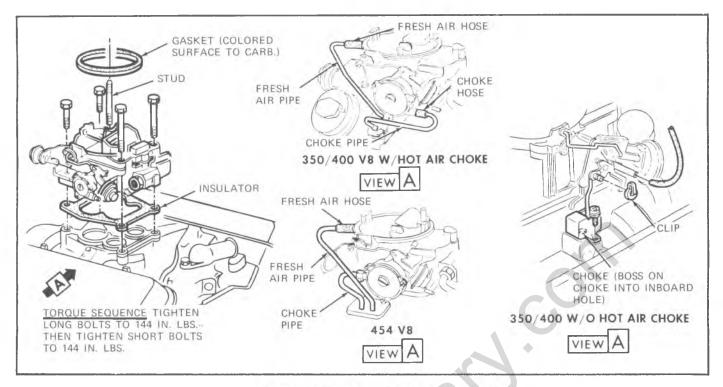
· Carburetor and Choke Pipes · V8, 4 Bbl.
